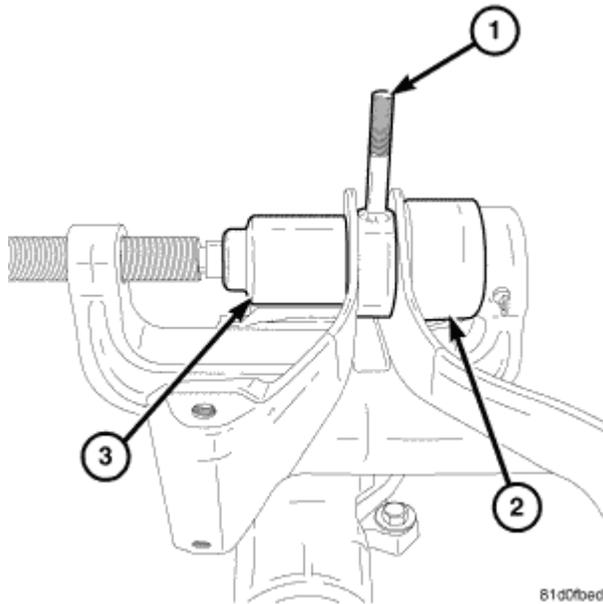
Identifying Spacer 9958-1, Receiver 9958-6 & Remover 9958-5
